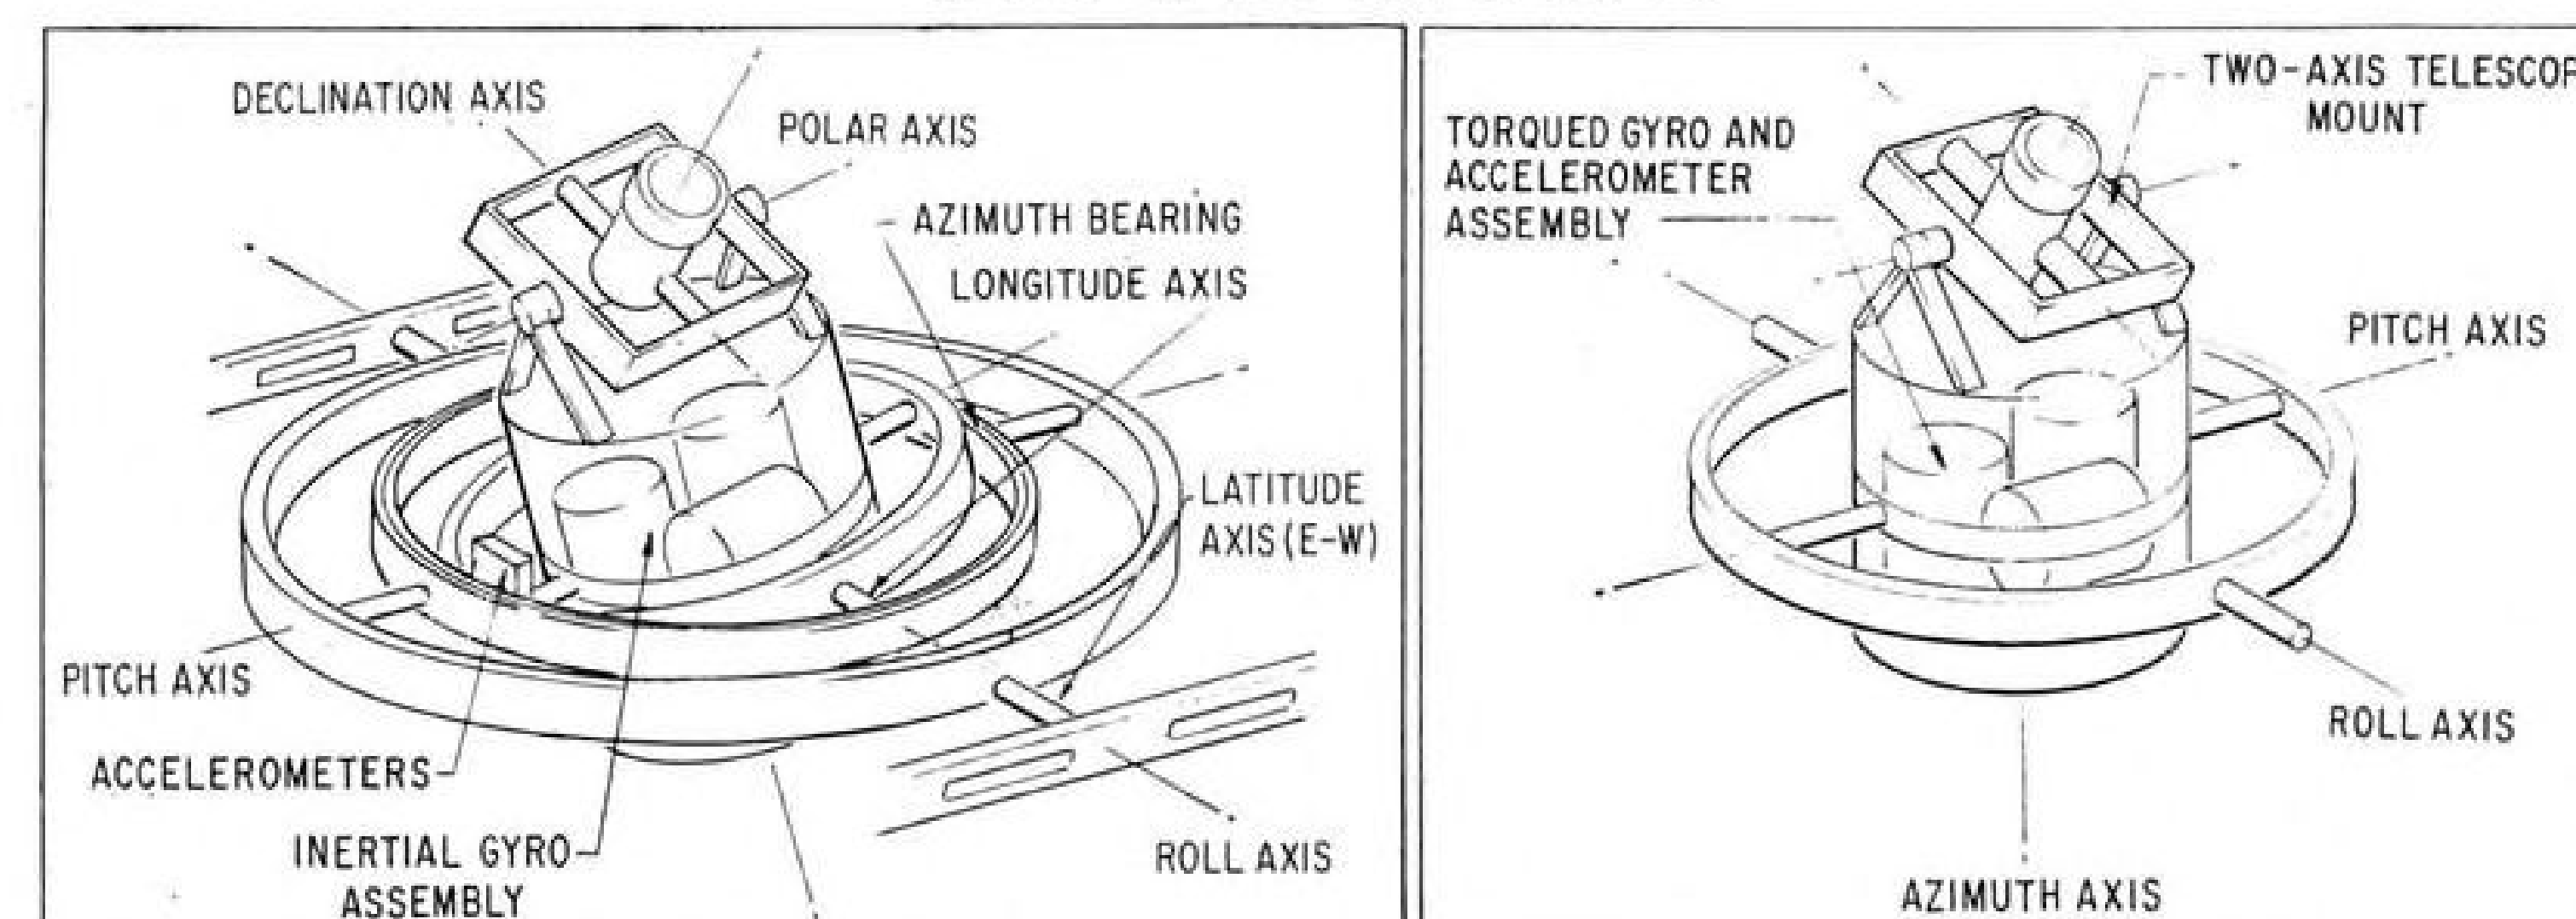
(left) shows platform with inertial gyro assembly. Note complex gimbal. Fig. 2 (right) shows torqued gyro assembly.
